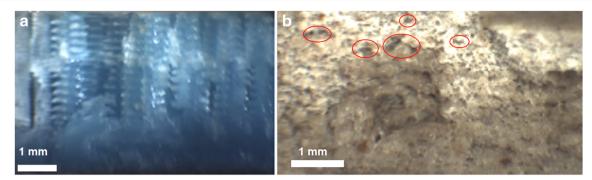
Fracture section of specimens. a PLA specimen with a layer height of 0.1 mm and filament width 0.3 mm. b Wood-reinforced PLA specimen with layer height 0.2 mm and filament width 0.7 mm. Both in 75% infill density
